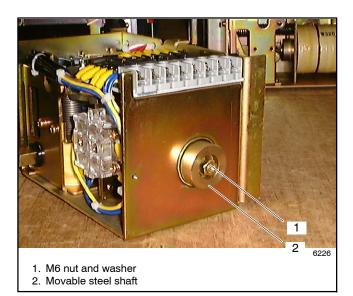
Movable Steel Shaft, 100-400 Amp Models
